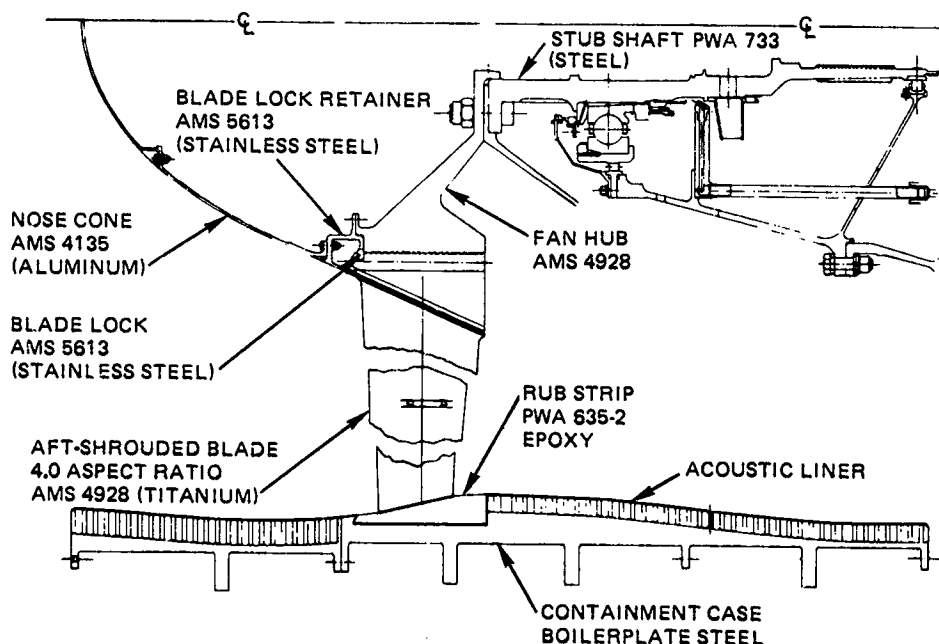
Shrouded Fan Rotor Assembly Materials
